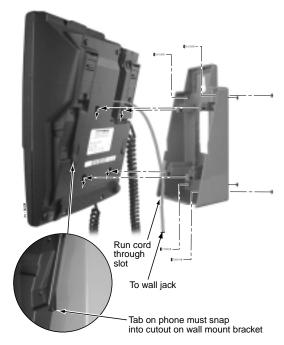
INSTALLING THE WALL MOUNT BRACKET
